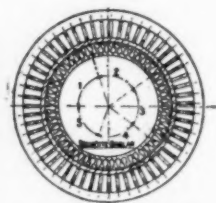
PISTON-HEAD RIBBING, STILL ENGINE
